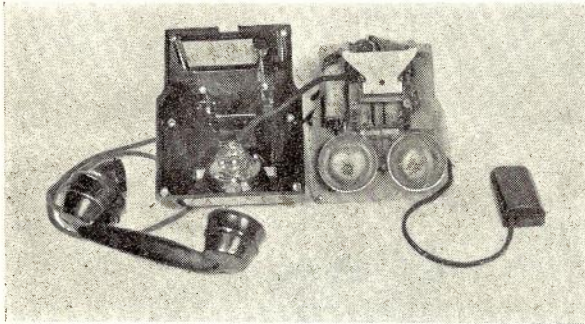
Complete Assembly of Telephone No. 300 A.T. Ready for Fixing Base Plate to Case.
